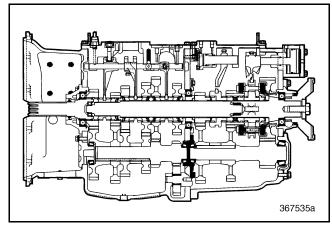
Front Countershaft Rear Bearing Cover Component Locator (T313L/T318L Shown)
